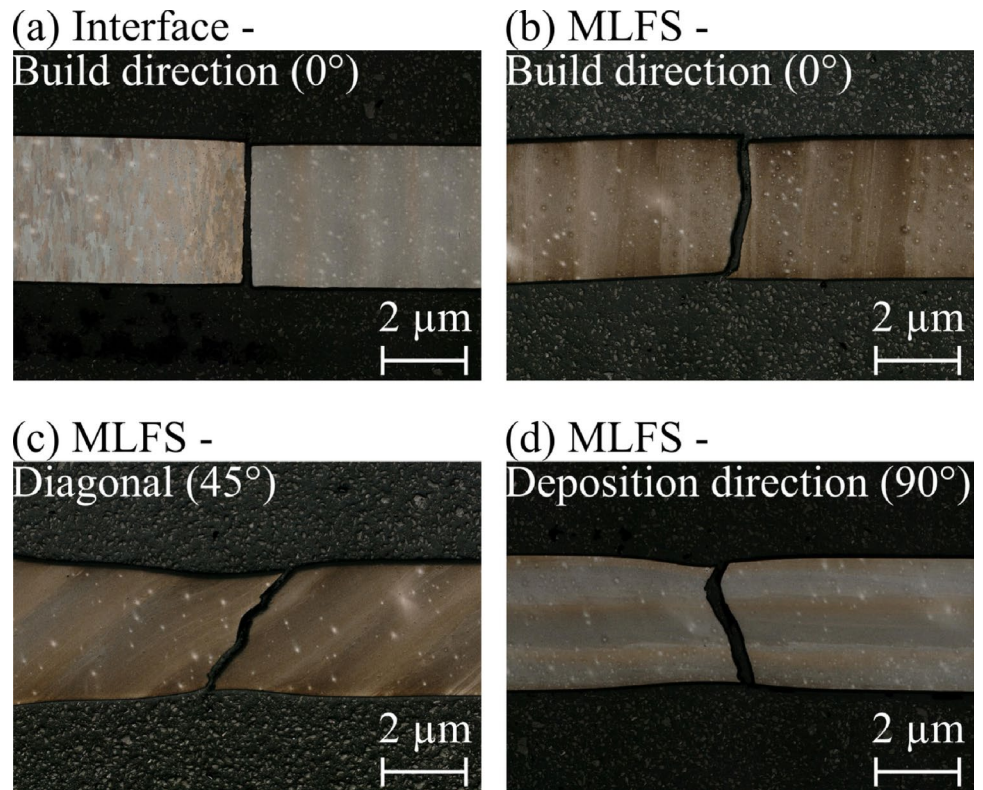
The fracture surfaces of the tensile specimens in all orientations. The build direction (0°) (a, b) and the diagonal direction (45°) (c) specimens show a mixture of ductile fracture indicated by dimples
